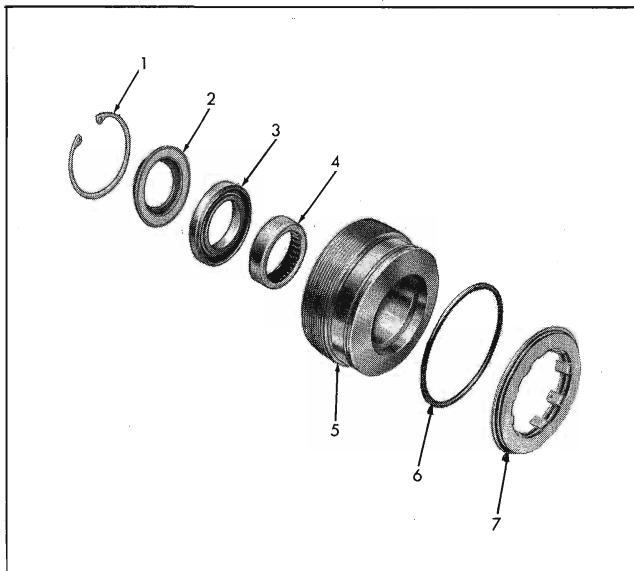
A-22 Installing Adjuster Plug Needle Bearing
